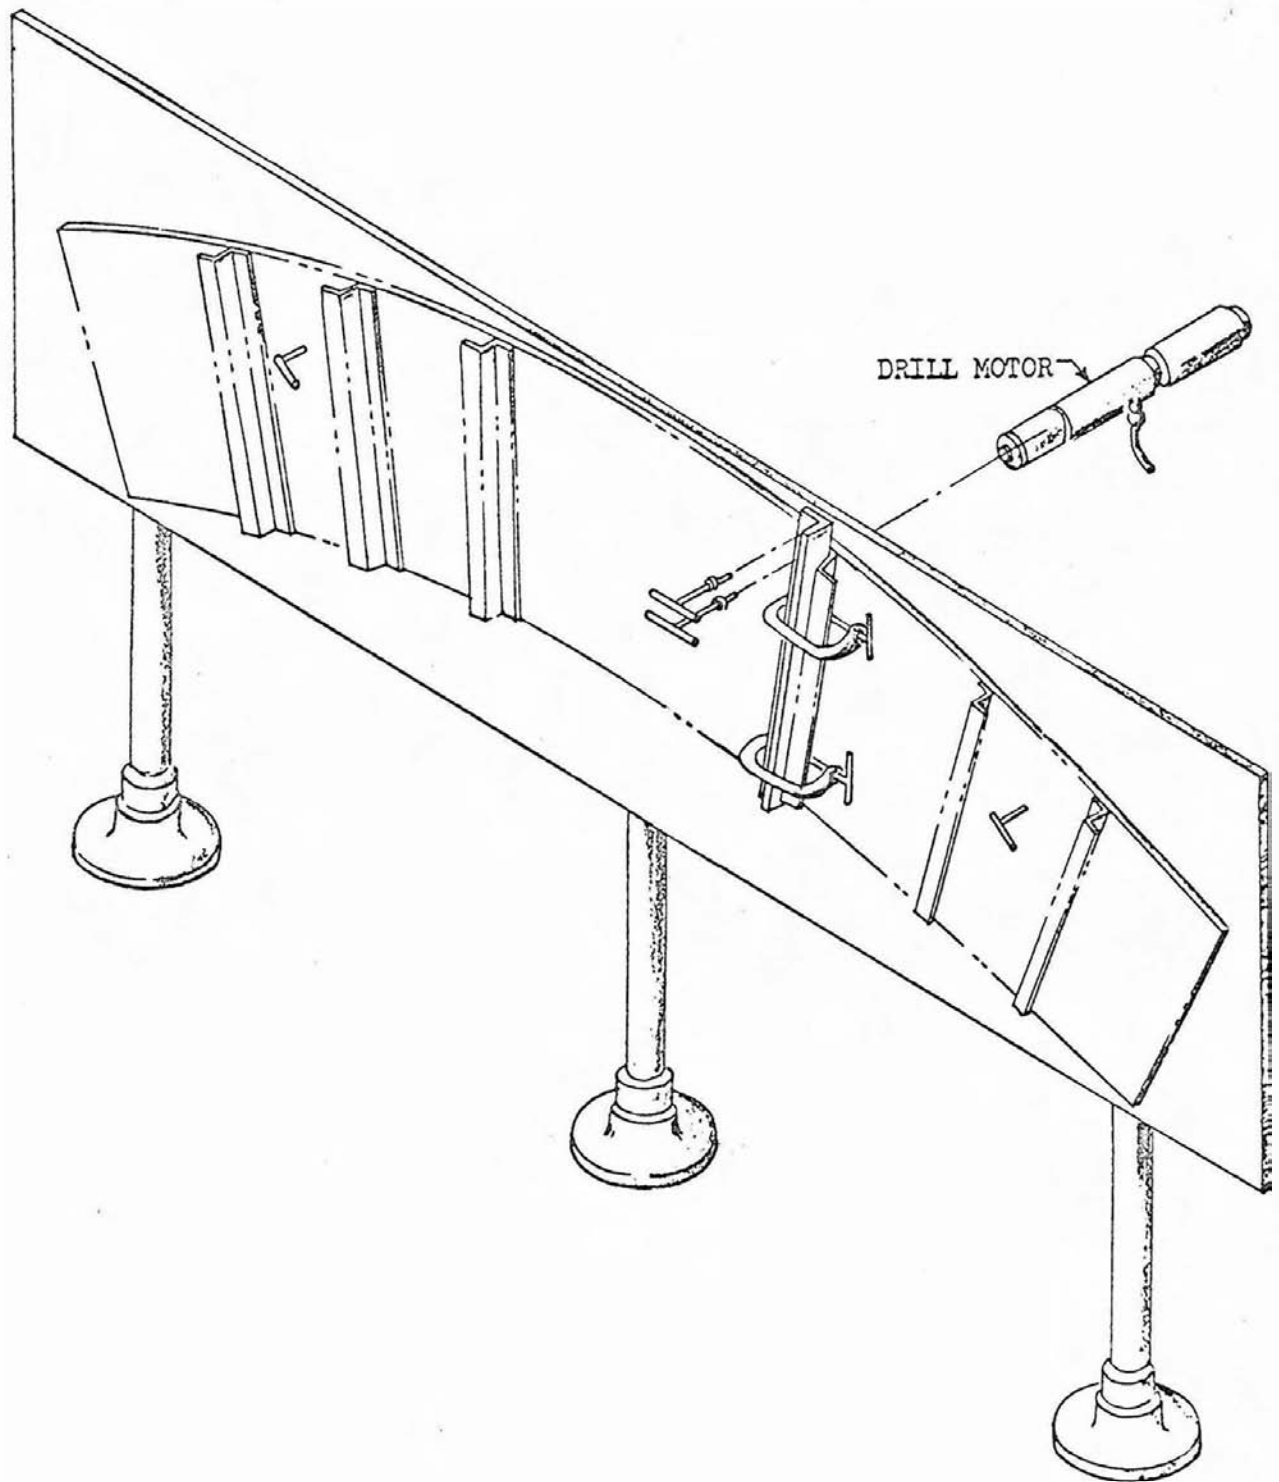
Typical Thrust Ring Web Assembly, Assembly Fixture
